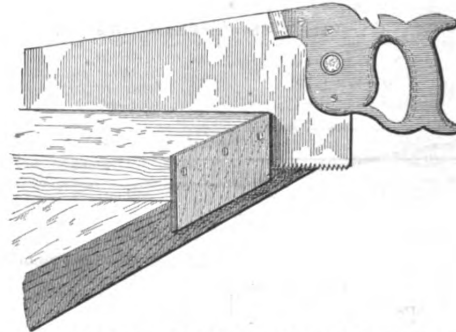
Showing Method of Using Saw and Gauge Board.
